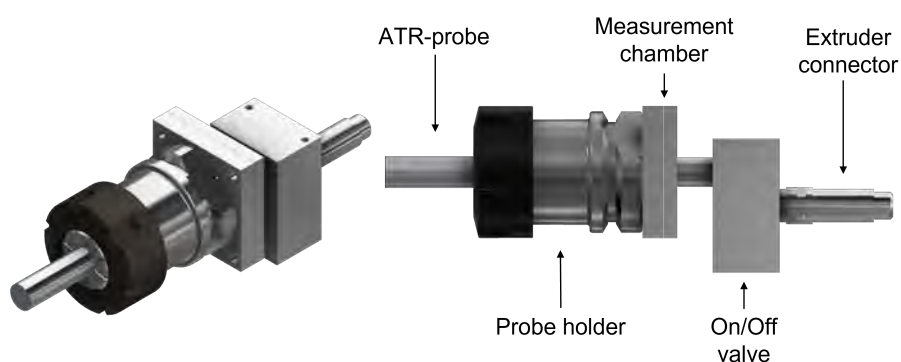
Probe Holder Unit and its components: extruder connector, On/Off valve (sample collector), measurement chamber, probe holder, pressure nut and the ATR-FTIR probe.
